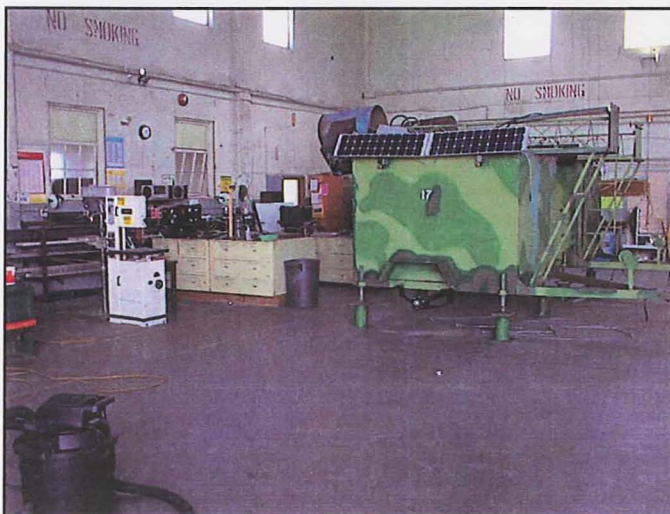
Inside view of the hangar showing seeding generator fabrication area and shop tools.
